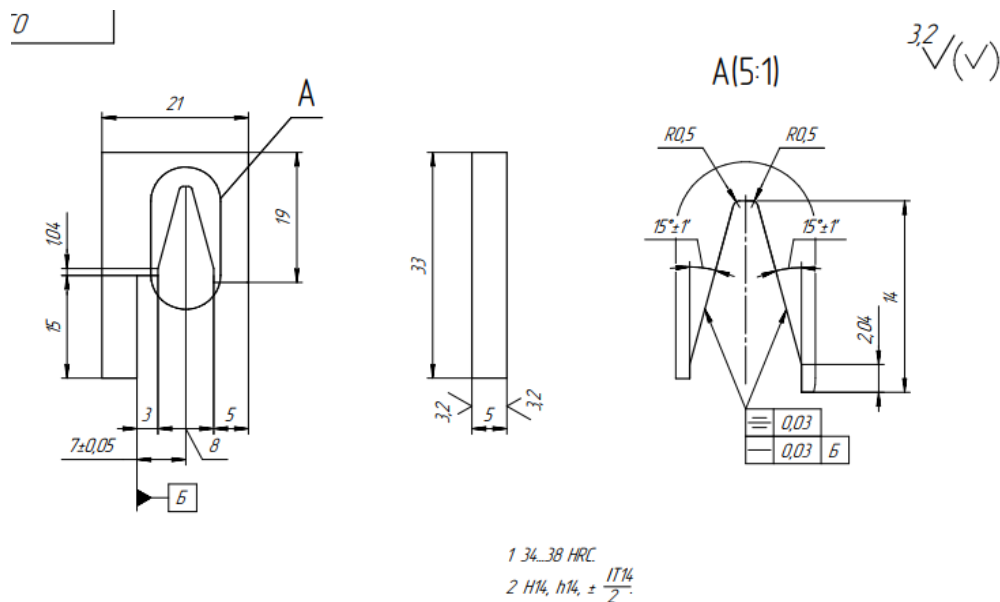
Template for sharpening the cutting plates of a special disc modular cutter.
